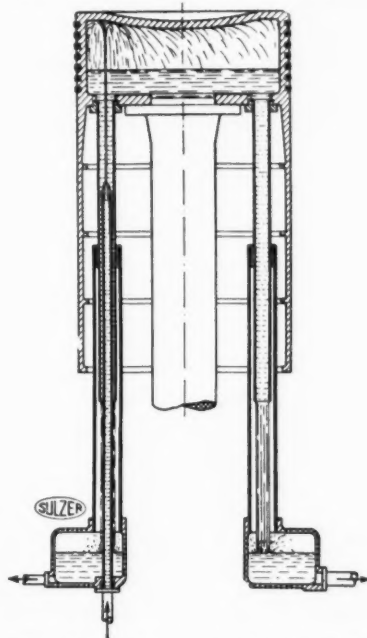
The piston cooling system used by many Diesel engine manufacturers, in which telescopic tubes are used instead of hinged points.
